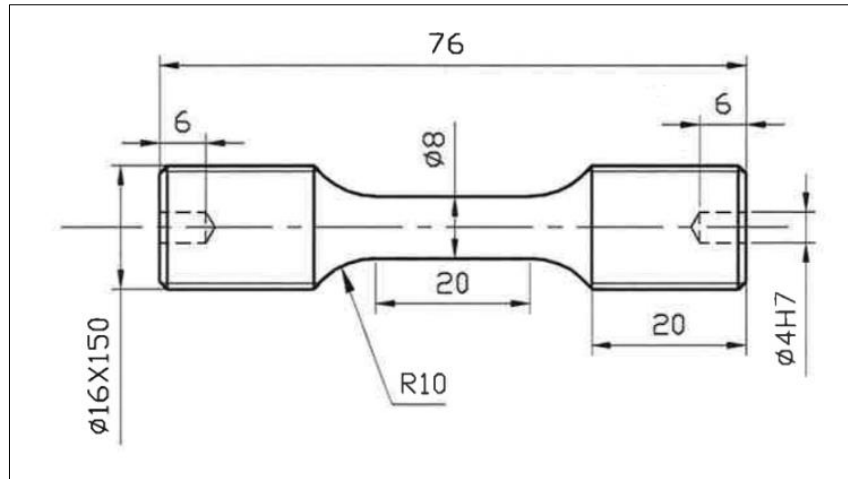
7 Geometry of cylindrical specimen of the tensile test by Bilotta [27].
